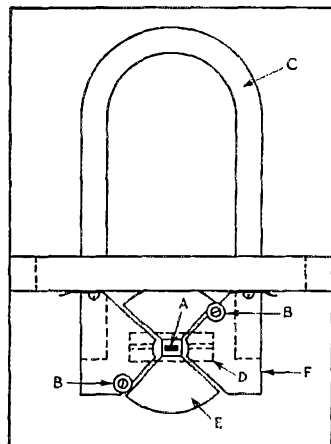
INDICATING POSITIONS OF THE SMALL IRON ROD AND ROTOR STOPS, TOP BEARING NOT SHOWN
